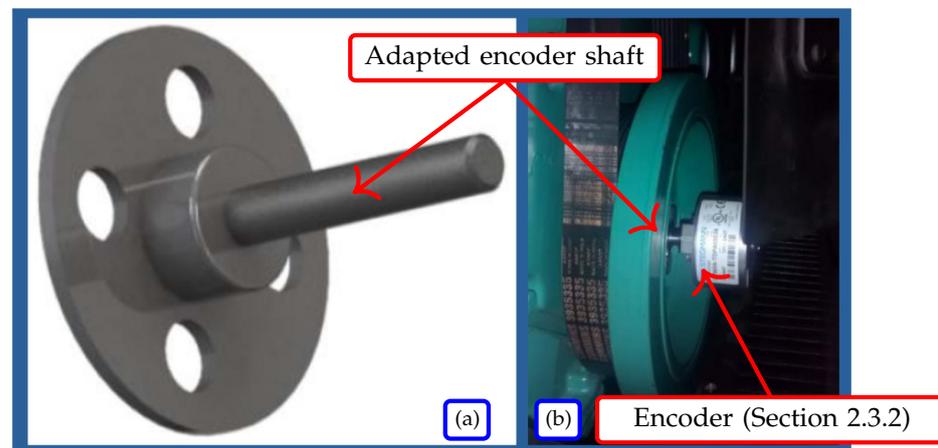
Adaptation of the encoder to the crankshaft pulley—(a) 3D concept of the adapter—(b) actual photograph.
